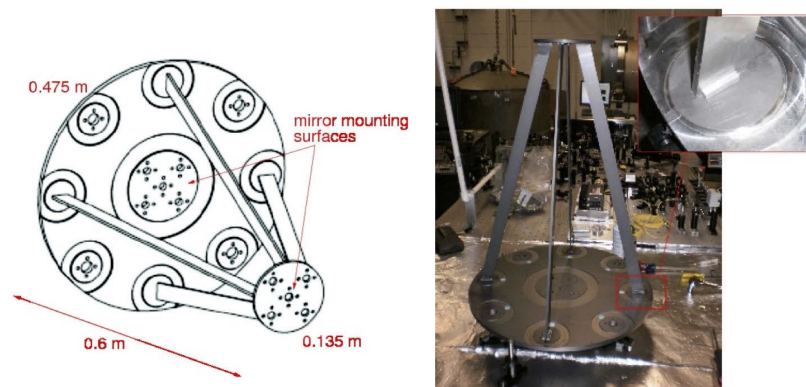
Left: CAD model of the telescope spacer. Right: photograph of the spacer mounted to primary and secondary plates with sister blocks to increase the mechanical stability. [2]
